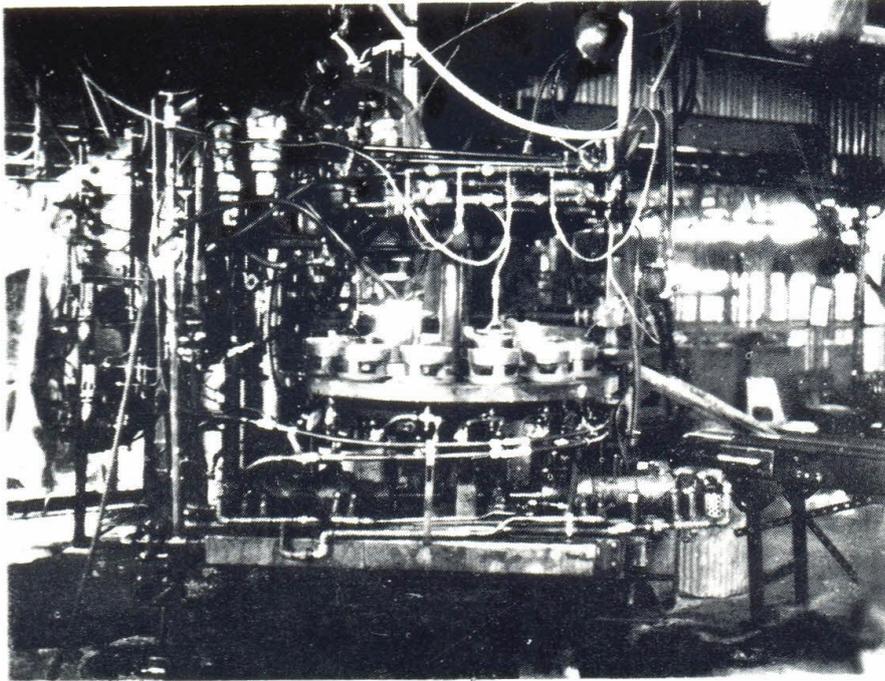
Photograph of glass and plastic forming machine with hybrid cooling unit
